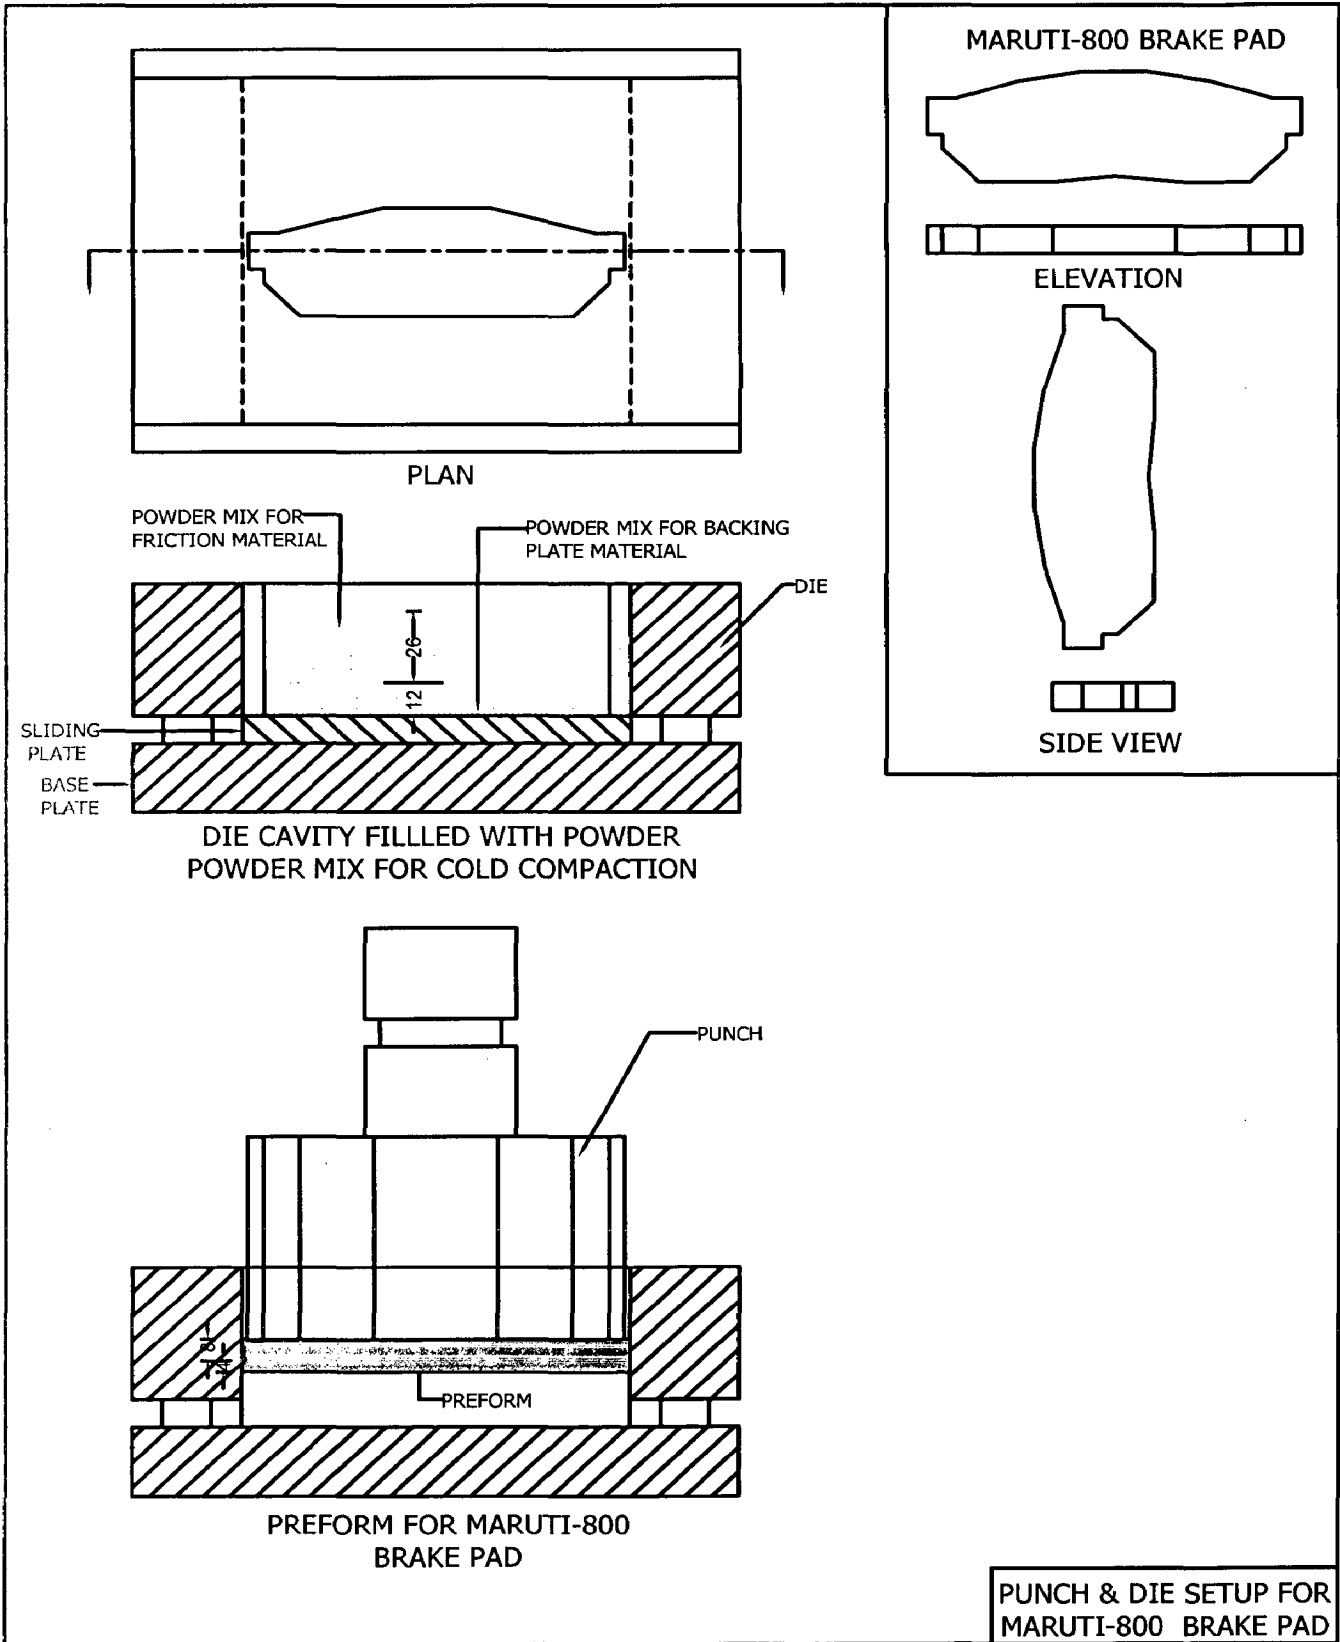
Punch & die setup for Maruti-800 brake pad
